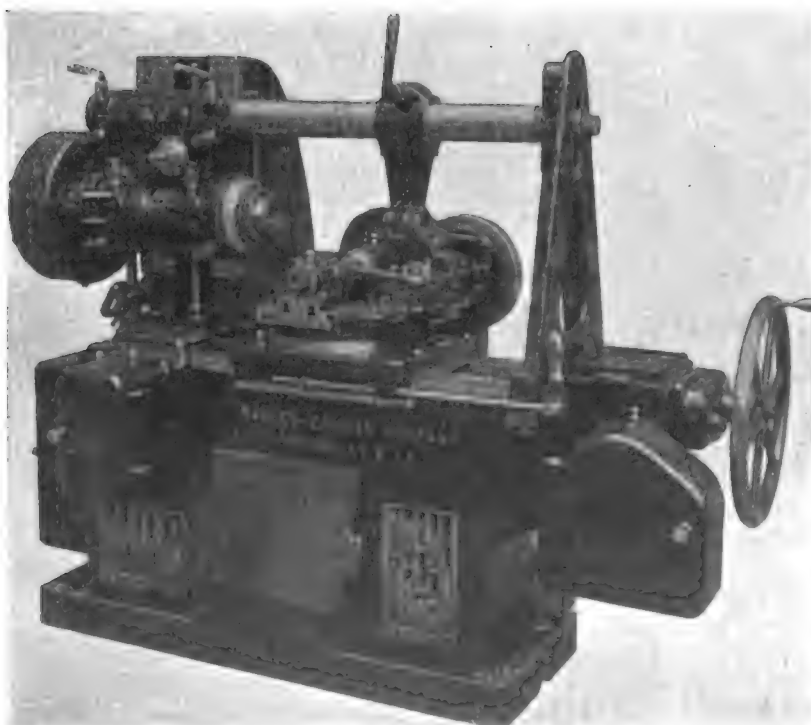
Barber-Colman (horizontal class) gear hobbing machine (hob travels)
